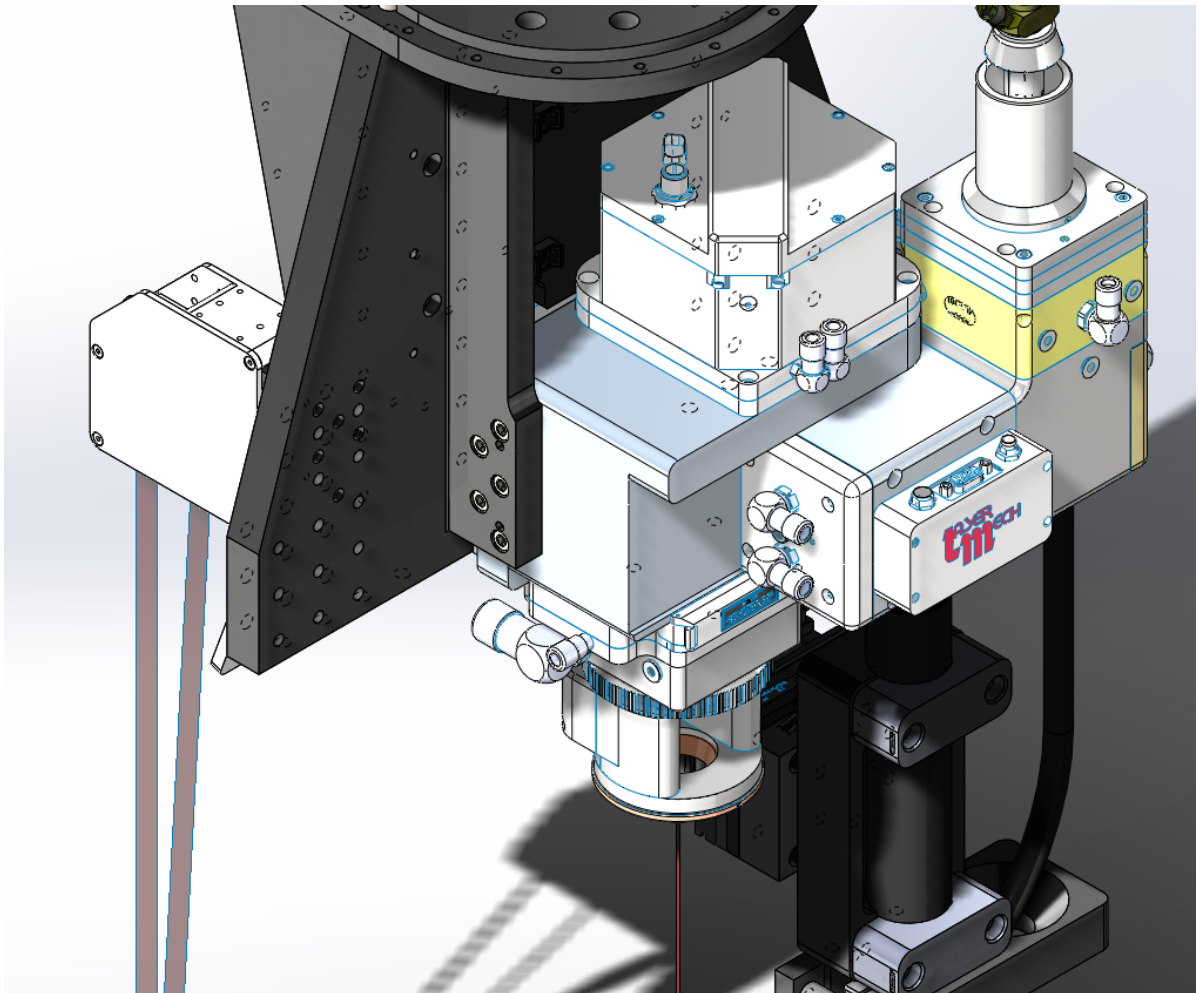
An isometric view of the printhead of the system used throughout the investigation with a focus on the LaserMech optical control system. Rendered using SolidWorks.
